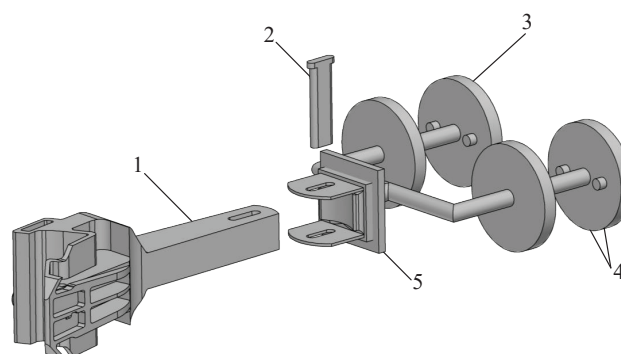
Concept design of automated coupling traction device: 1 – automated coupling casing; 2 – wedge; 3 – piston; 4 – throttle valves; 5 – stop bracket
